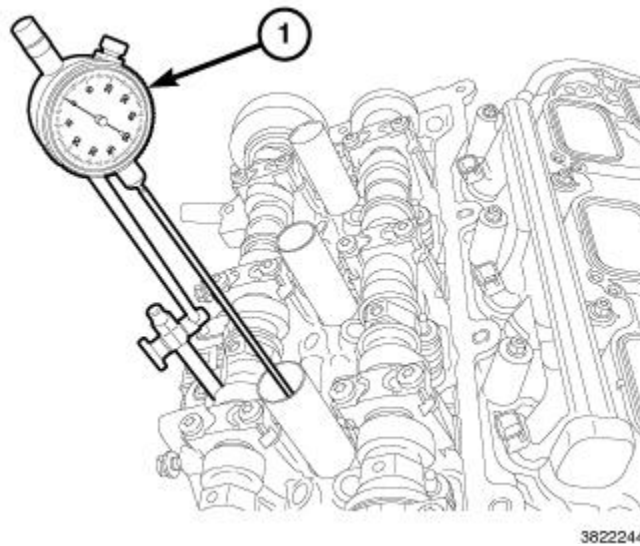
Mount Dial Indicator Set To Stationary Point On Engine
